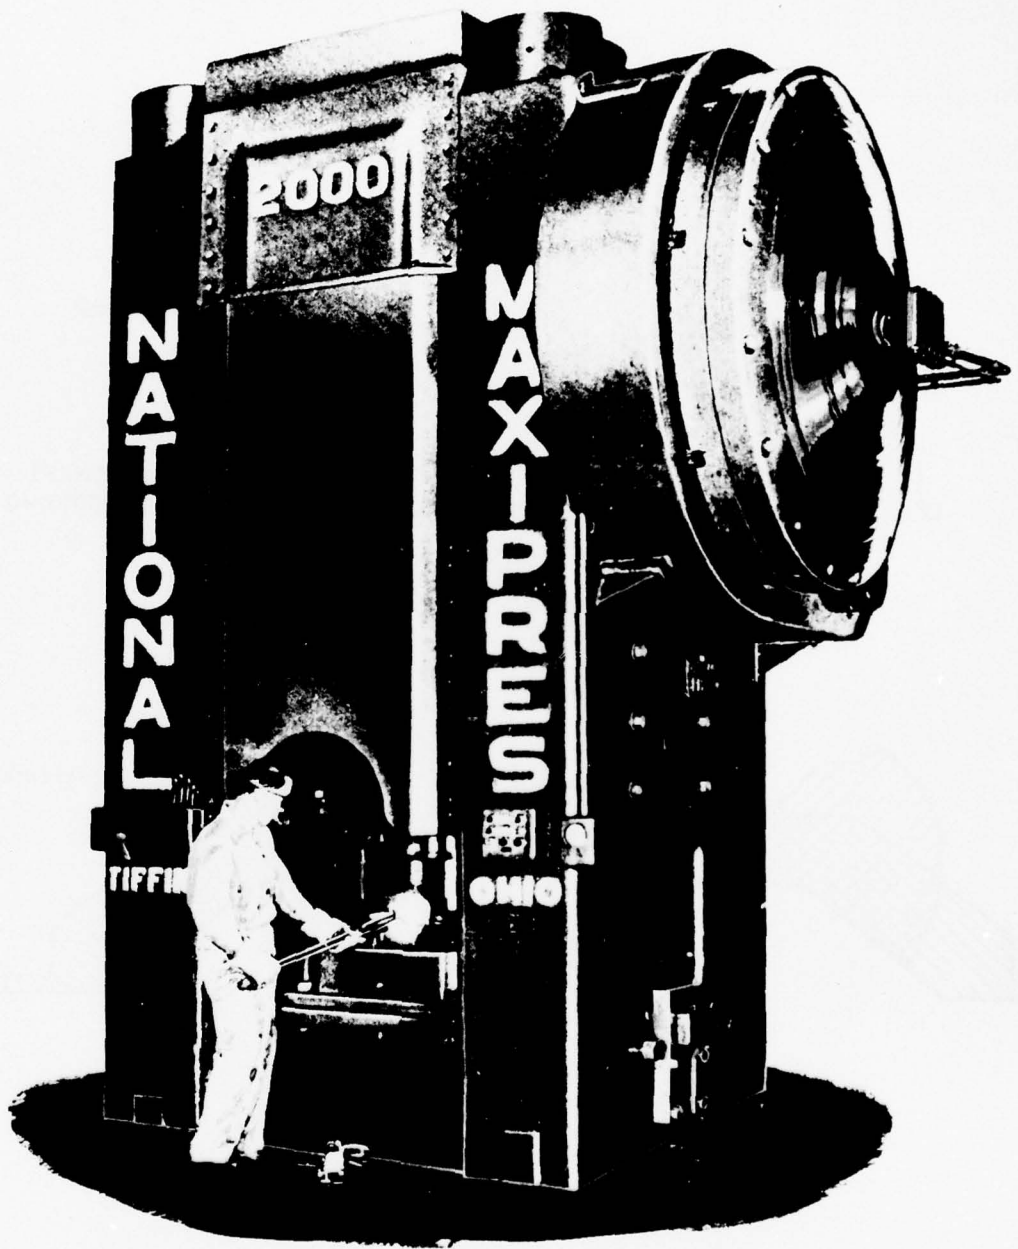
Rigid-Frame Single-Crank-Type Mechanical Press Used for Close-Tolerance Forging of Spiral Bevel Gears.
